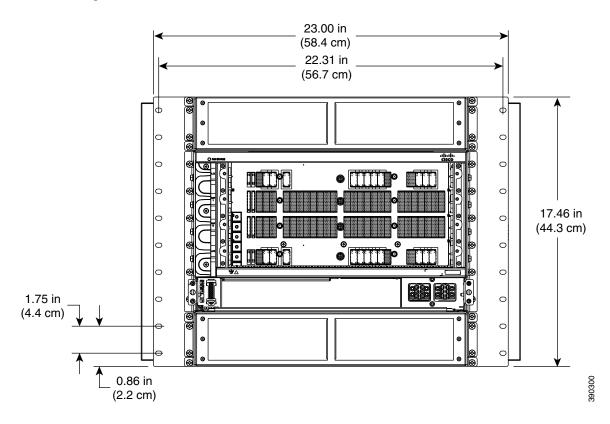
Cisco ASR 9904 Router Air Baffle Dimensions – Front View
